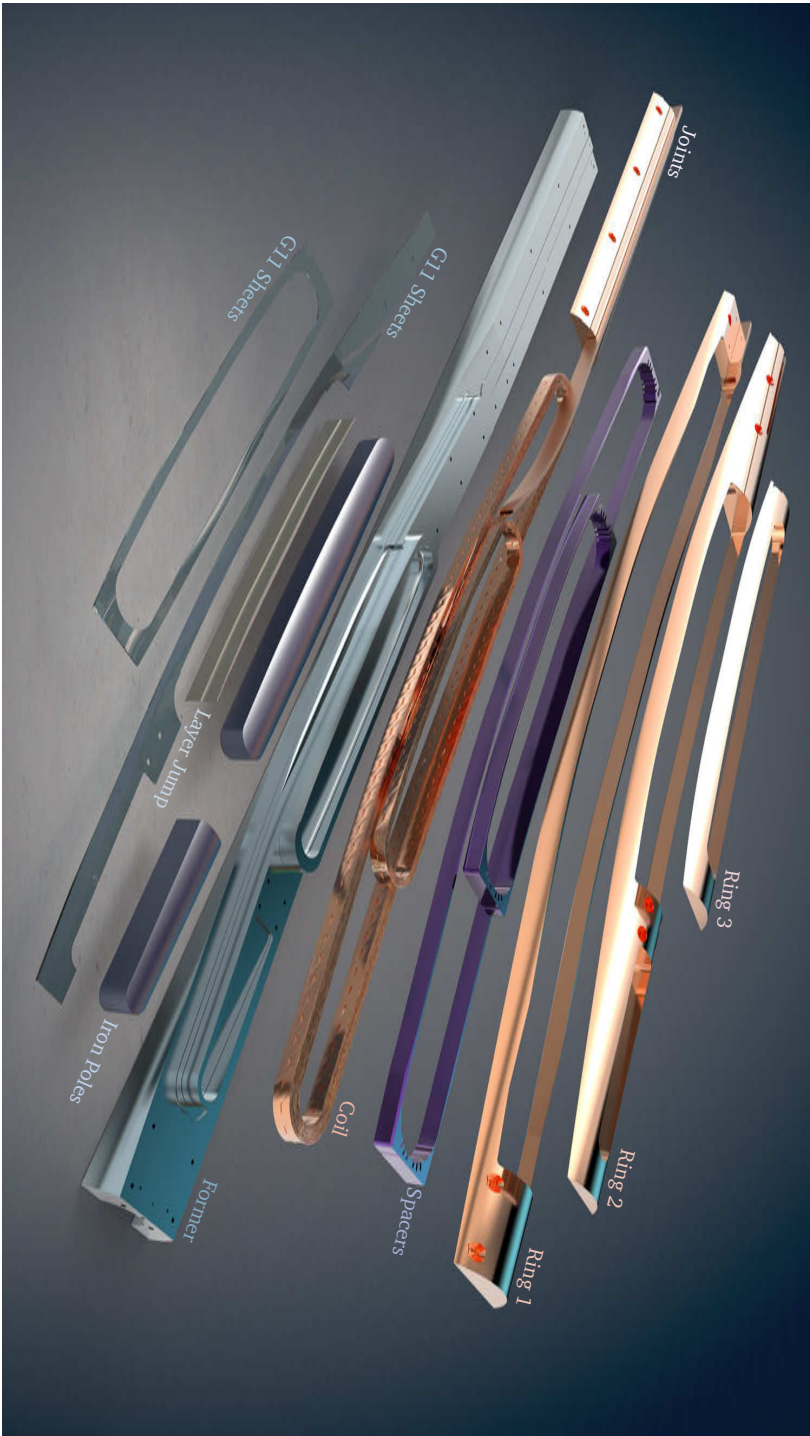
Exploded view showing all the parts making up one of the Feather-M2 magnet poles. Visible from top to bottom are the copper rings, the spacers, the coil-windings and joint area, the former, the iron poles and the G11 insulation sheets.
